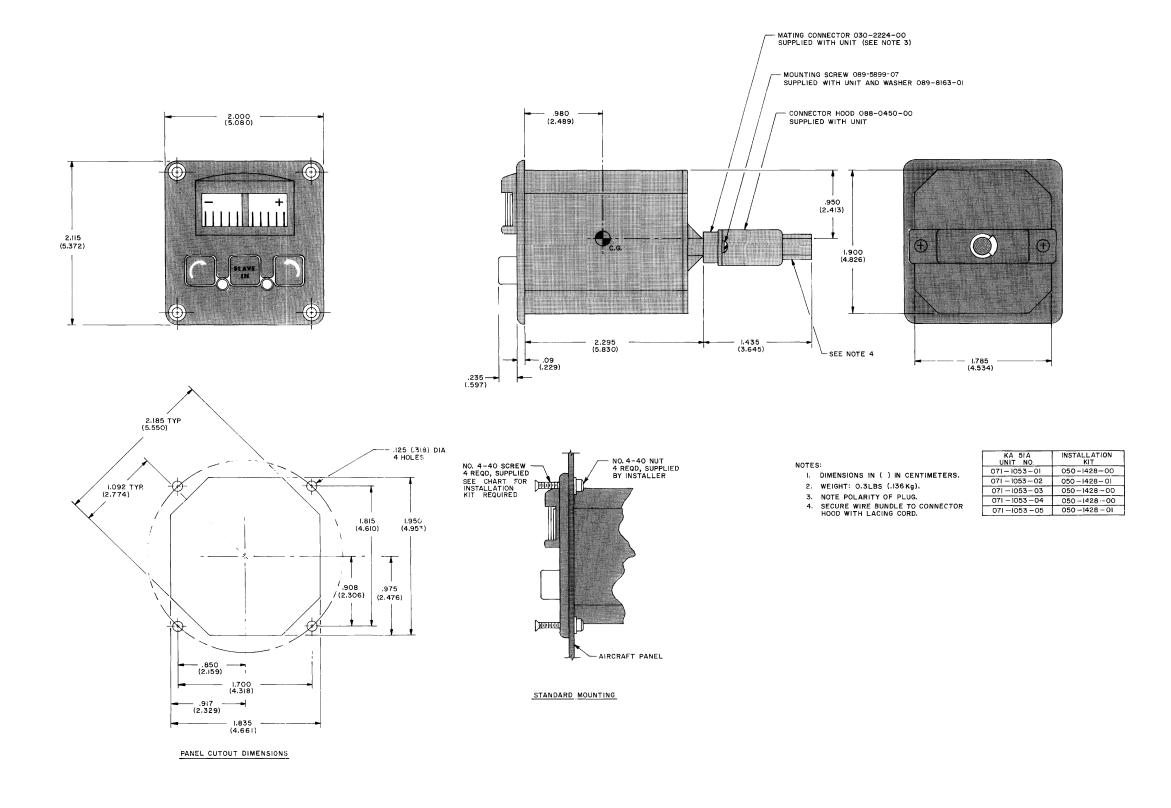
KA 51A INSTALLATION DRAWING (Dwg. No. 155-05144-0001, R-3)
